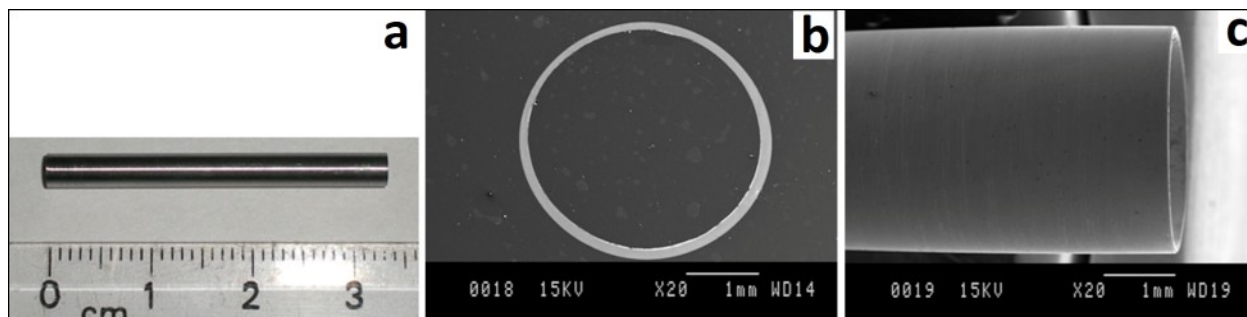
Electroformed iron tube after grinding: (a) image, (b) cross-section and (c) surface by SEM.
